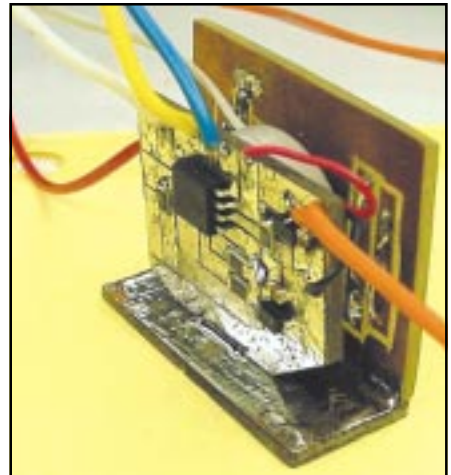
Soldering the IC board to the top board between the touch pad boards.
